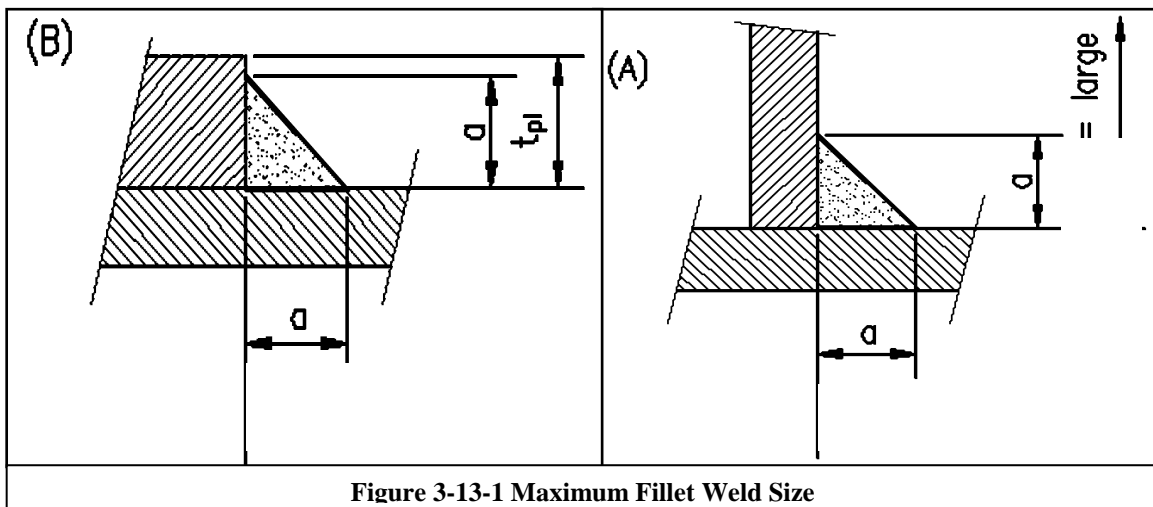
Maximum Fillet Weld Size
